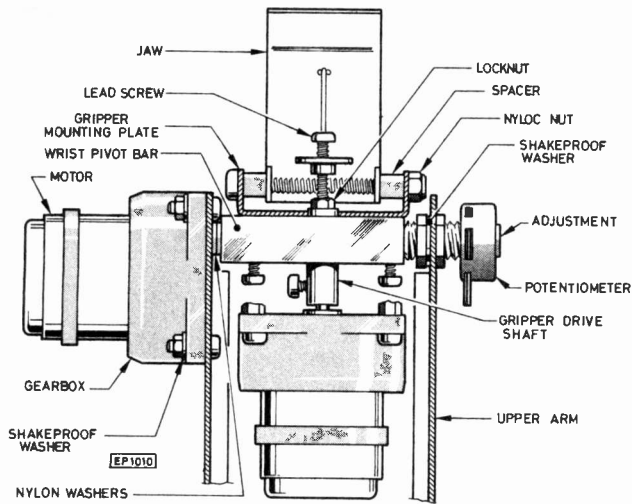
Linkage between motor, gripper mounting bar and potentiometer for axis 3 movement
